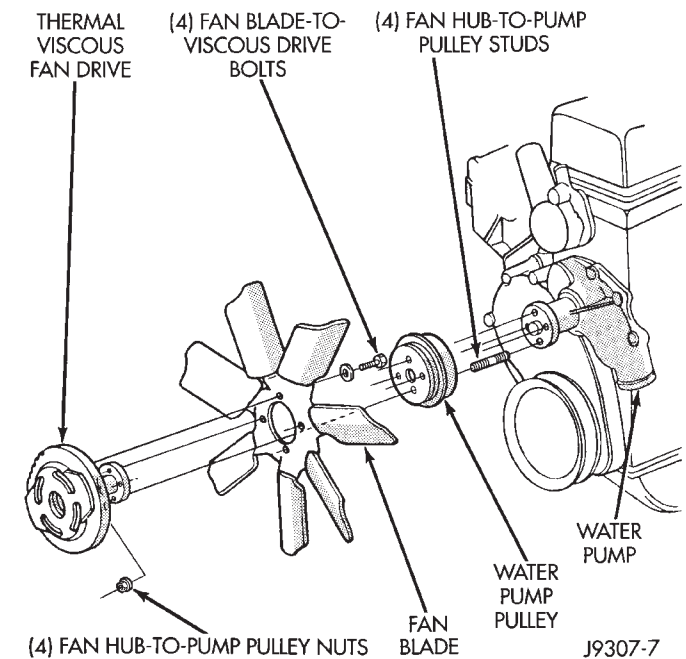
Fan Mounting Nuts—4.0L 6-Cyl. Engine
